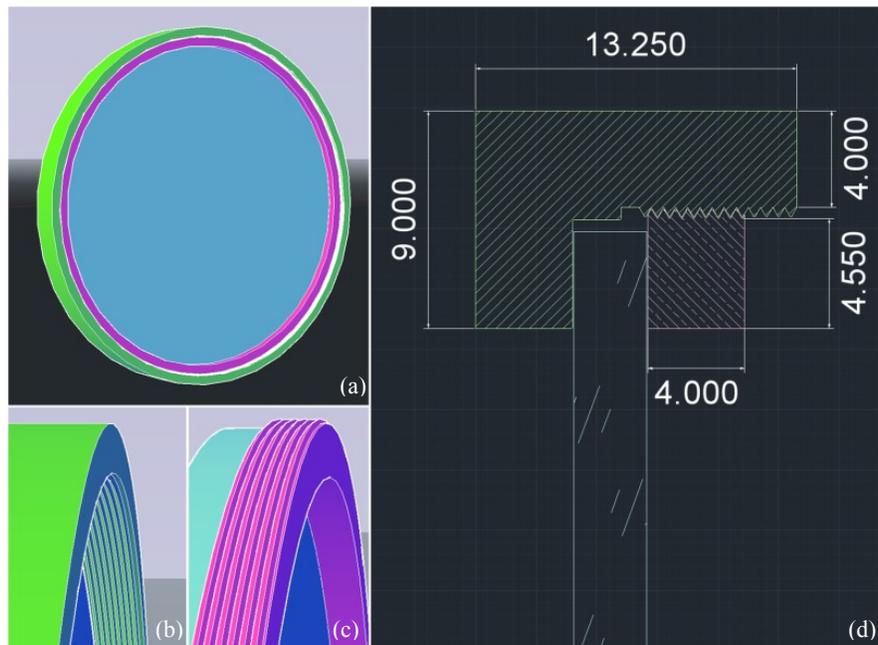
(a) A 3D model of the proposed custom mount. (b) The threaded mount. (c) The threaded retaining ring. (d) Schematic of the custom mount; dimensions in mm.
